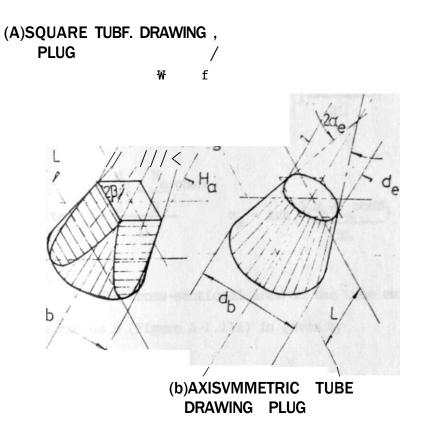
SKETCH SHOWING THE SQUARE AND THE CORRESPONDING AXISYMMFTRIC TUBE DRAWING PLUG
